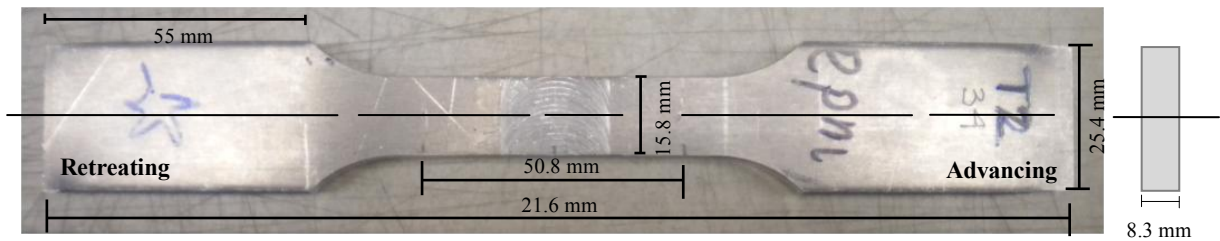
Self-reacting friction stir weld tensile test specimen dimensions. Tensile test specimens were prepared perpendicular to the weld direction.
